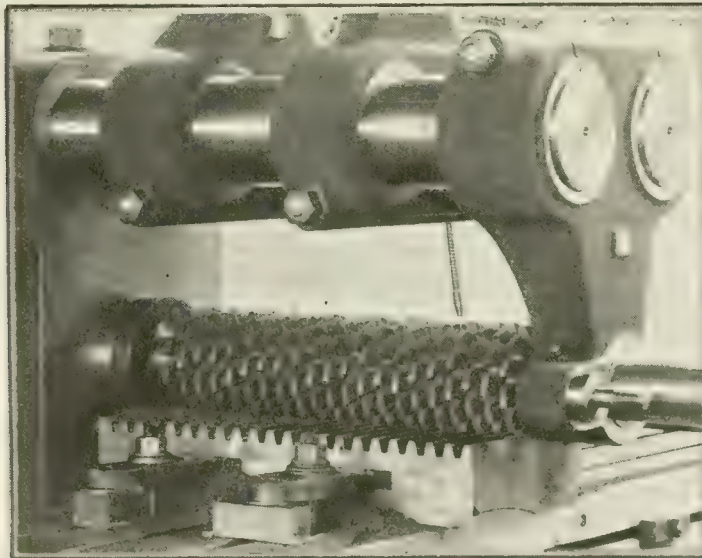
CUTTING A RACK WITH 21 TEETH AT ONE CUT.
